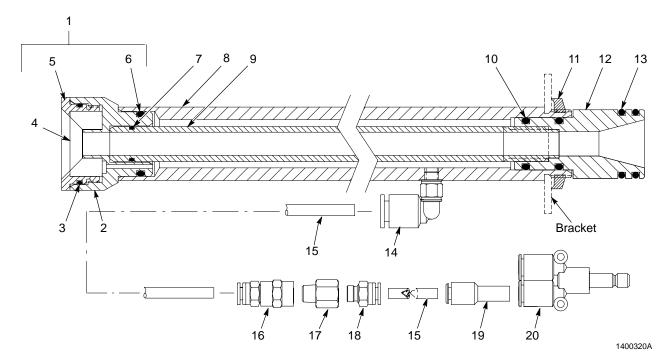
O-Ring Fit Fluidizing Pickup Tube Kit
